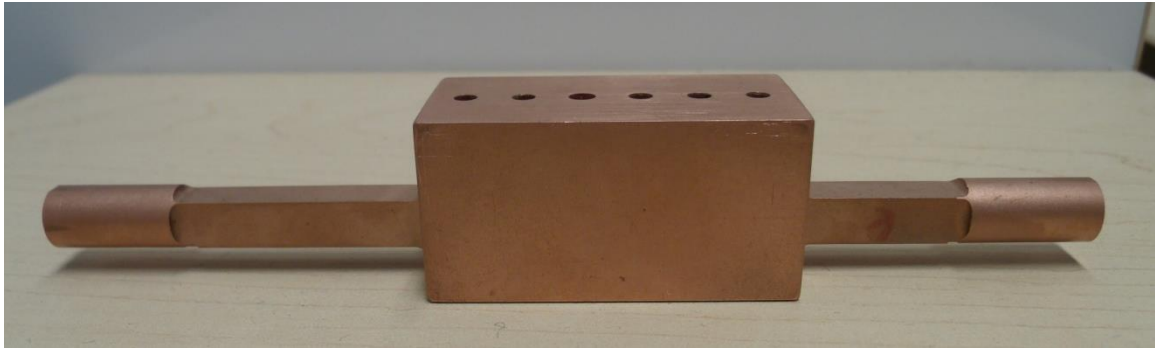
Side View of Smooth Cooling Channel (3.2 mm x 3.2 mm Cross Section)
